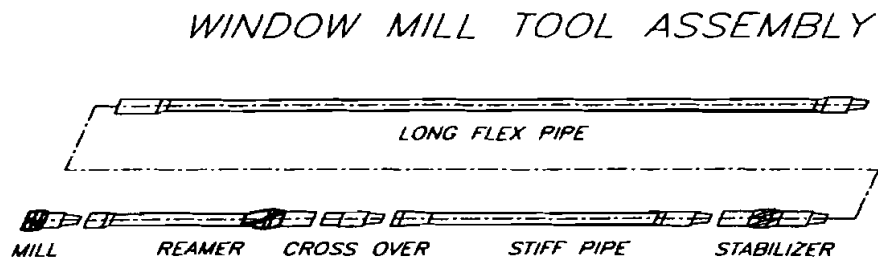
CT Starter Mill Assembly for 5½-in. Casing
